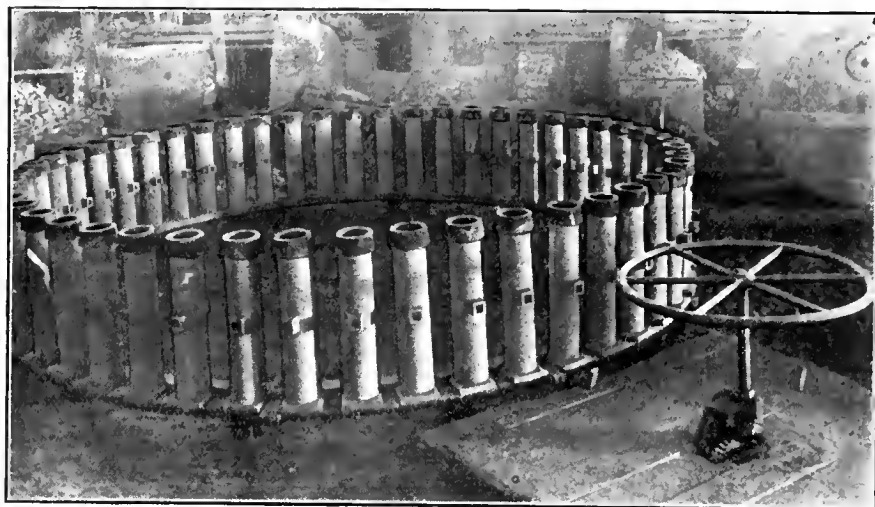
BATTERY OF INGOT MOLDS READY TO BE POURED.
